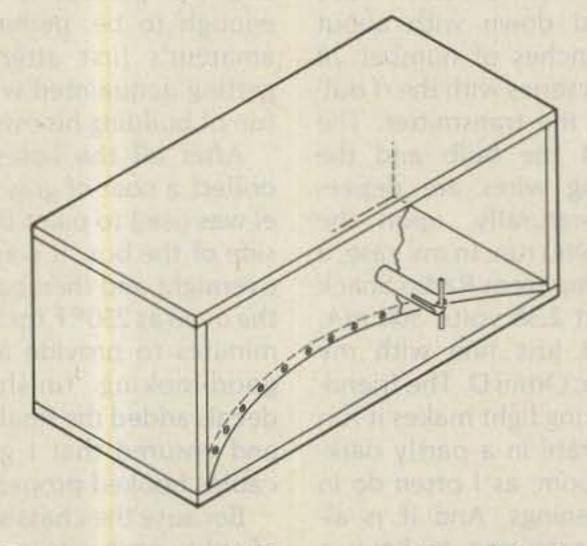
Box construction with cutaway view of the lower surface support rib.
